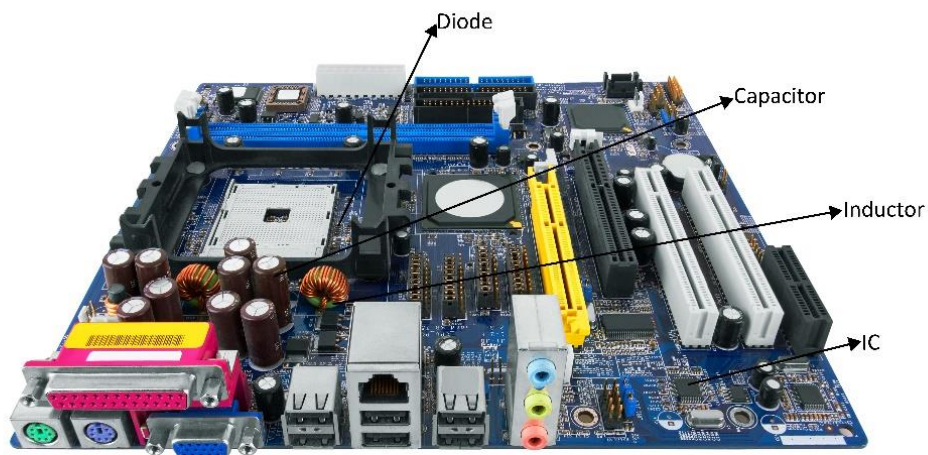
Some electronic components on a motherboard's PCB
